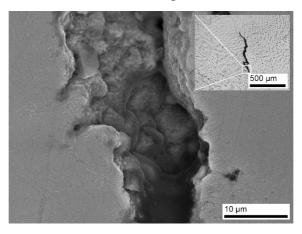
Solidification crack in a sample welded with 120A welding current. Clear indication of a dendritic structure in the crack opening. Crack length 706μm.
